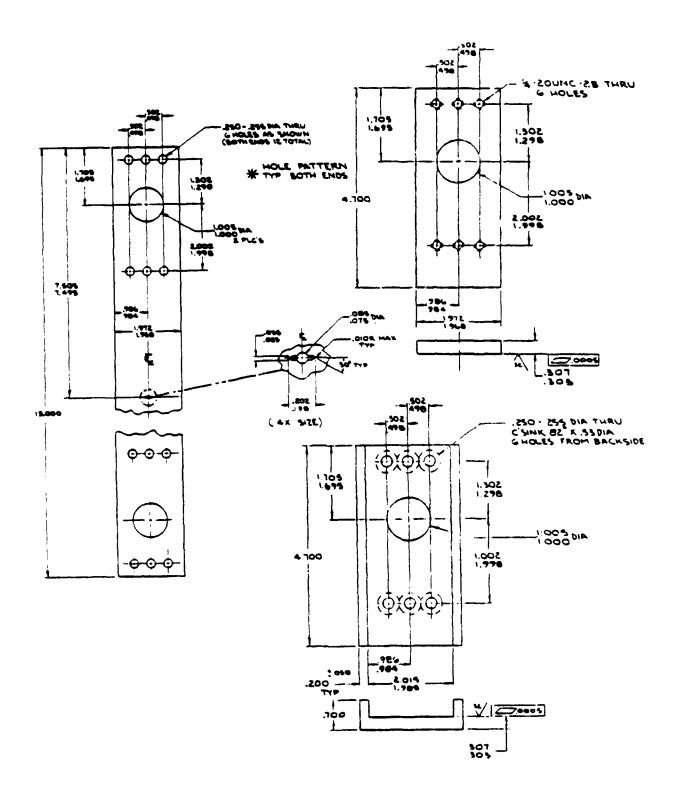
Drawings Showing the Dimensions of the Preliminary Specimen Used for 200 Hz Testing
